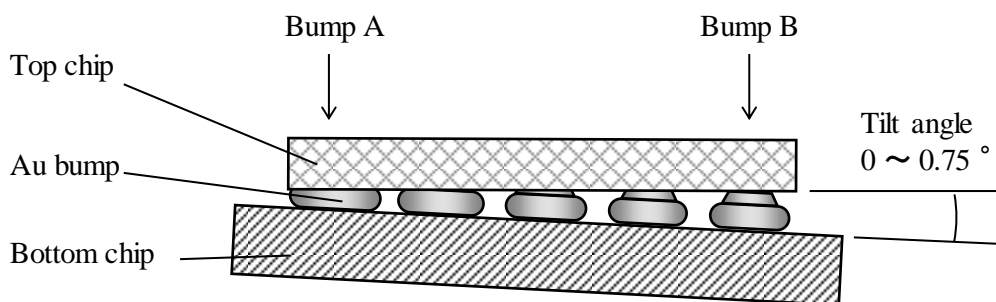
COC bonding specimen with tilted bottom chip.
